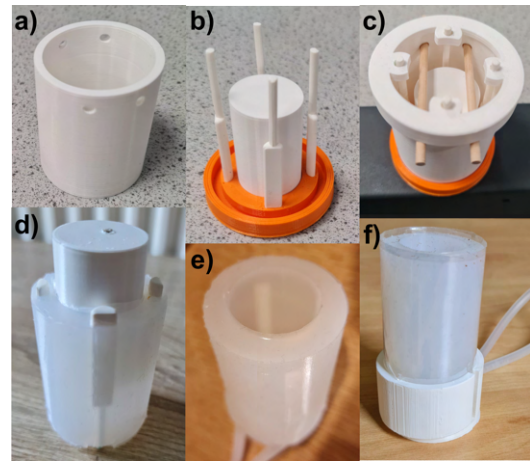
Fabrication stages a) The outer shell of the gripper mould. b) Inner mould components including channel moulds and cavity mould. c) Fully assembled mould. d) First stage silicone casting. e) Fully cast silicone structure. f) Final gripper with outer sleeve and bracket attached.
